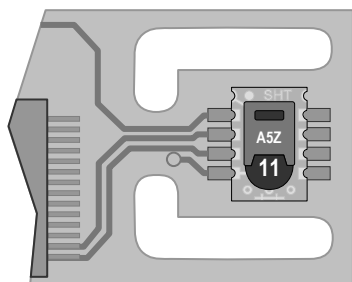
Top view of example of mounted SHT1x with slits milled into PCB to minimize heat transfer.
